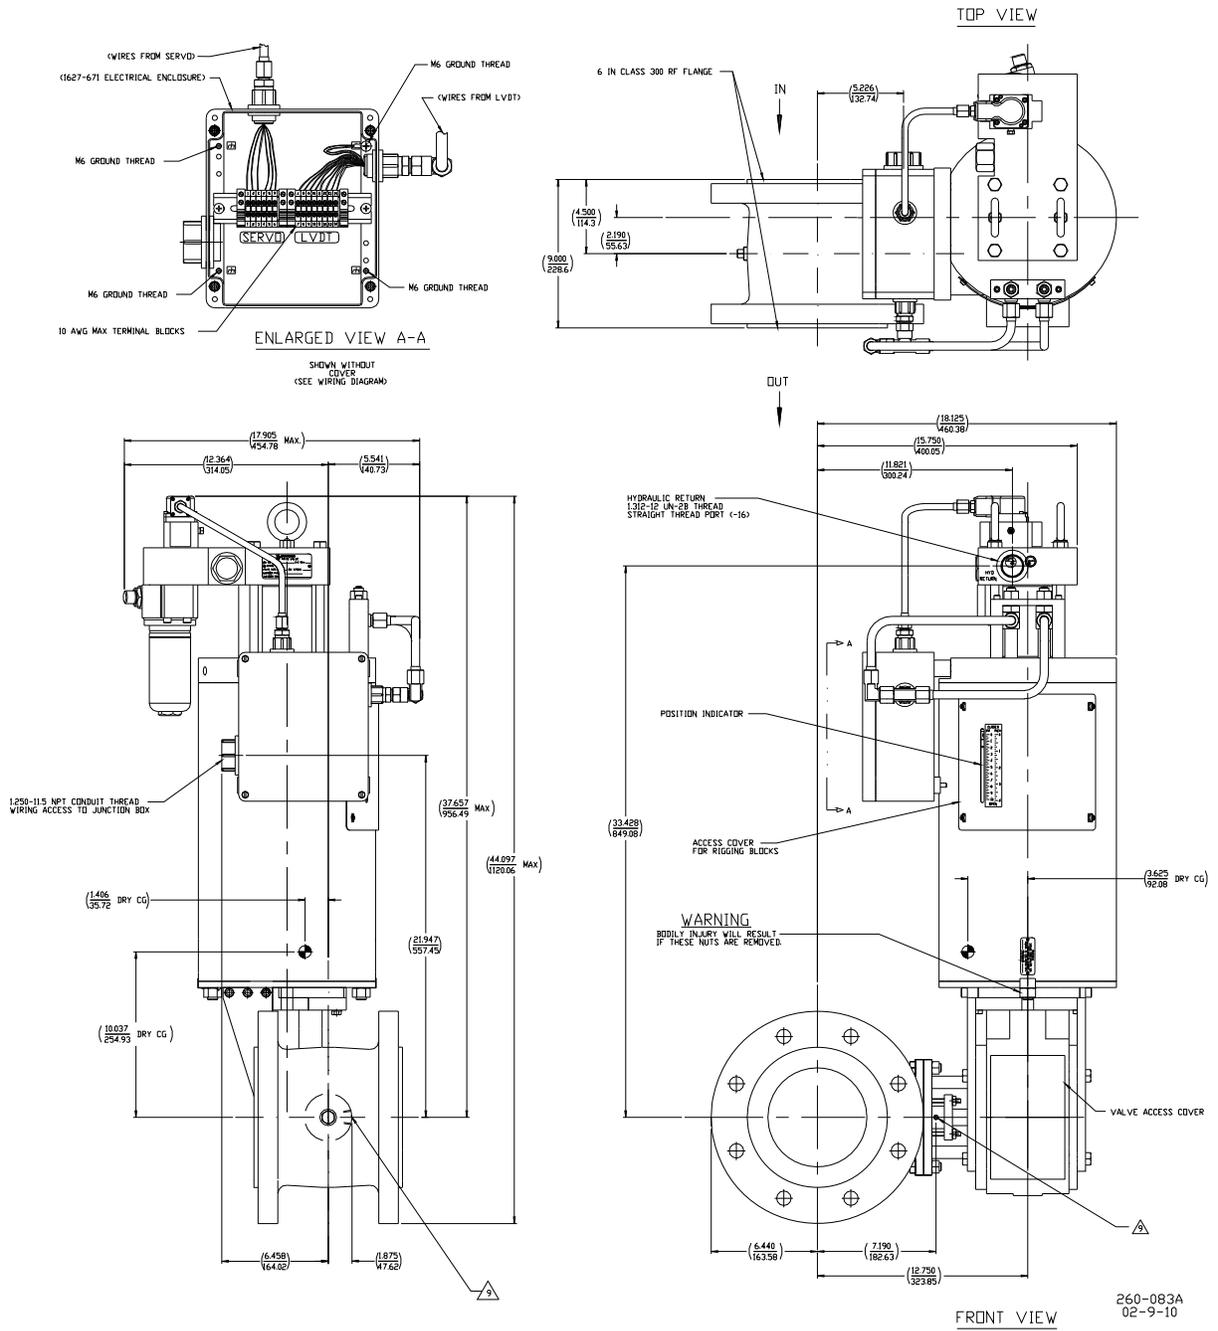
Gas Stop/Ratio Valve Outline Drawing (6-inch, SS-260)
